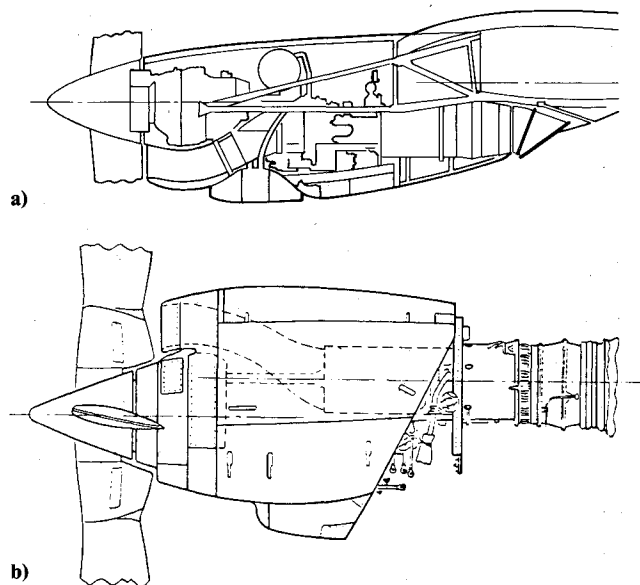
DDA T 56 engine in a) Lockheed C-130 and b) P-3 nacelles.
